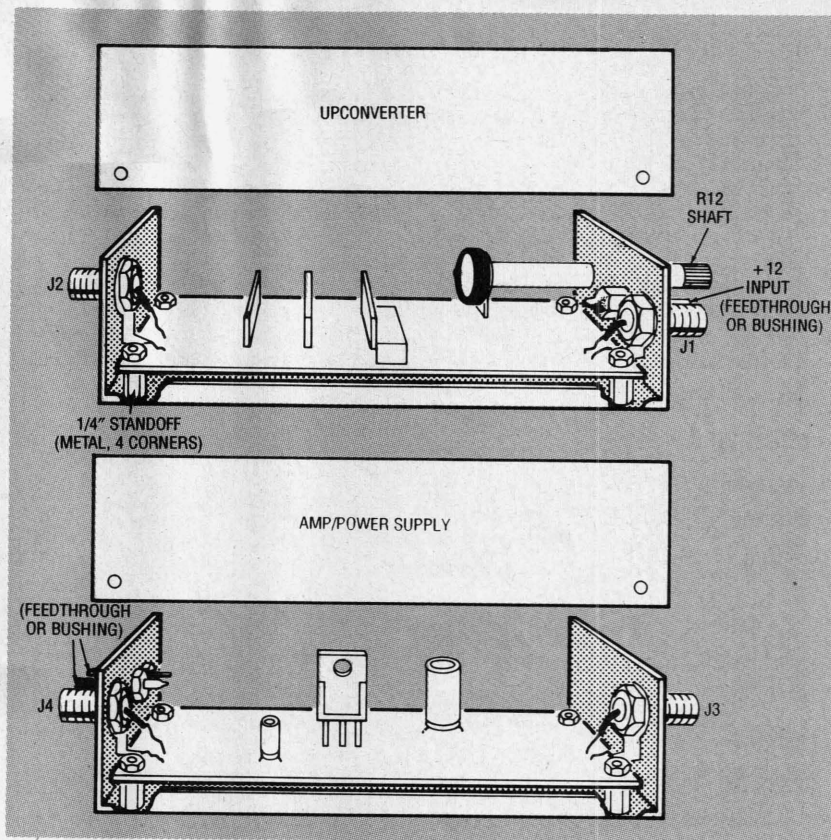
SUGGESTED PACKAGING SCHEMES for the upconverter and amplifier/power supply boards.
